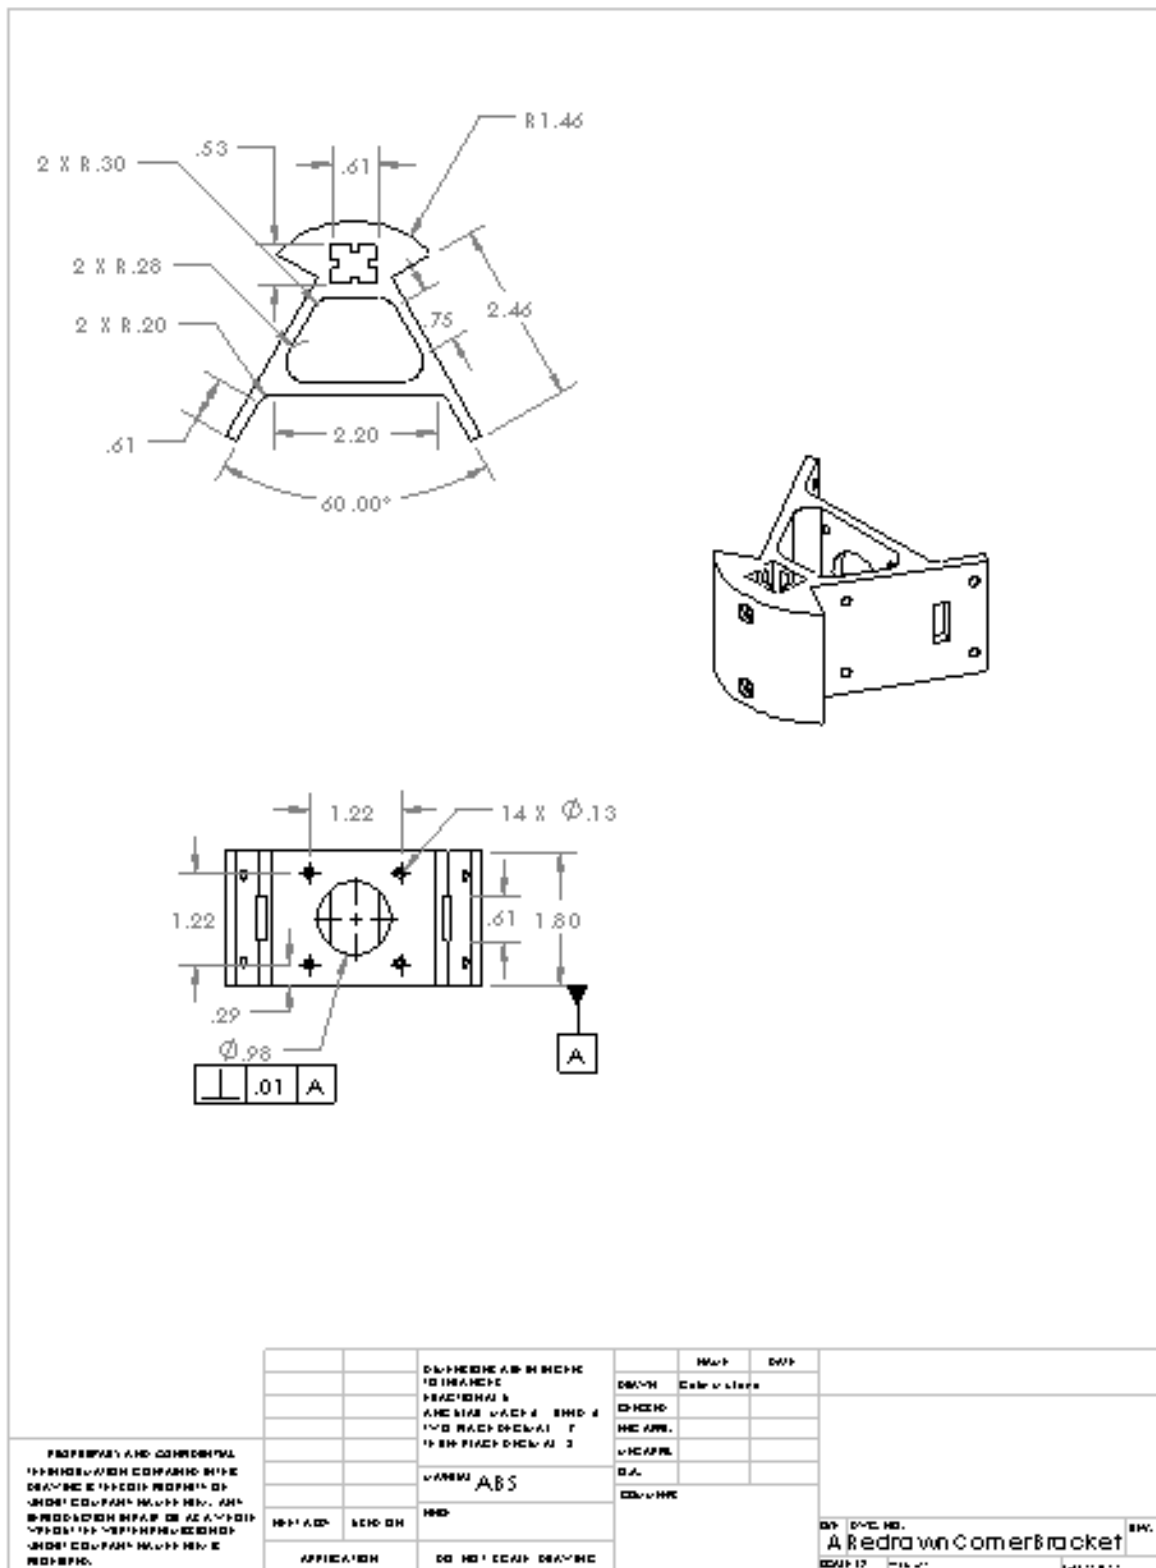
Dimensioned Drawing of Existing 3D printed corner bracket
